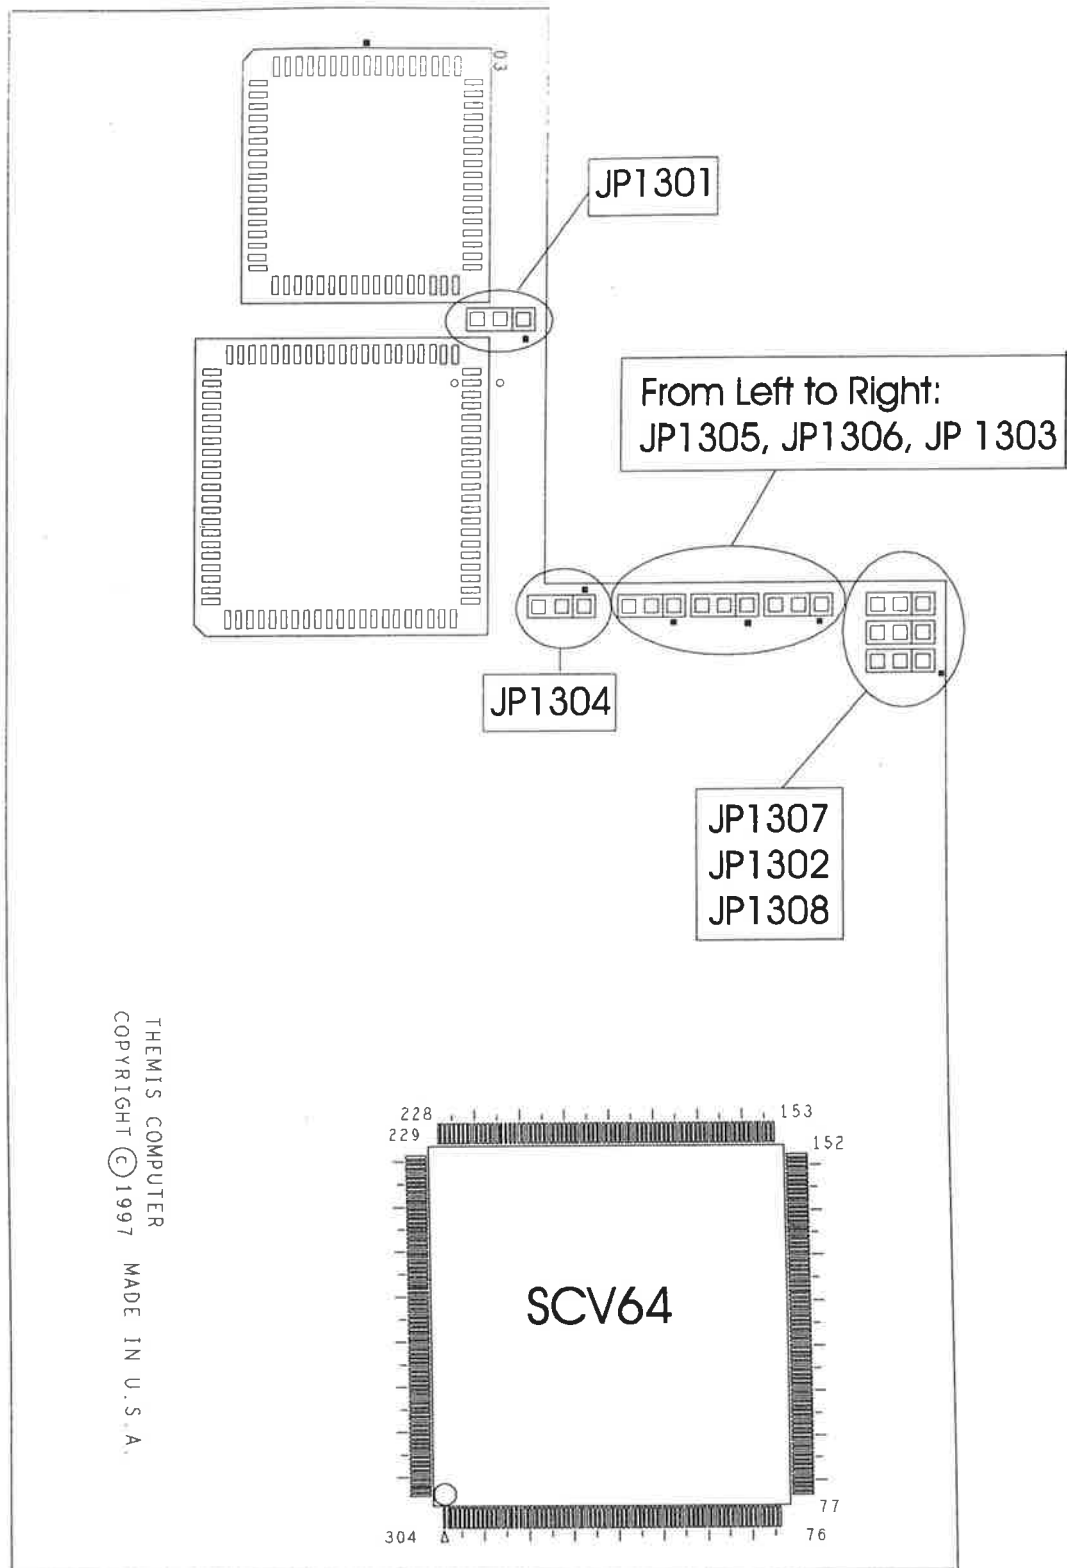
Component Side: VSIC Board Solder Bead Location
